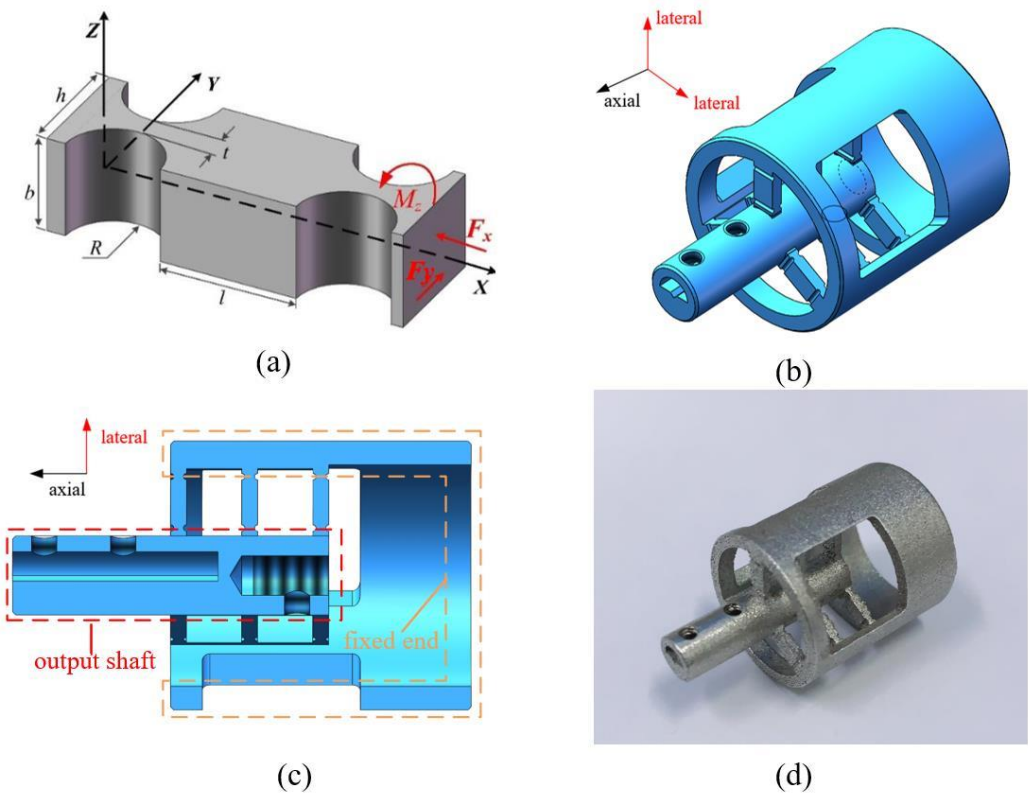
Optimized design and production process of flexure mechanism: (a) Schematic diagram of flexure hinge; (b) Isometric drawing of flexure mechanism; (c) Sectional view of flexure mechanism; (d) Physical picture of flexure mechanism.
